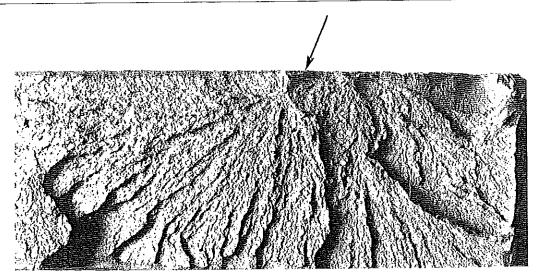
(b). Sketch of pattern of brittle fracture in a moderately hard, strong metal.
